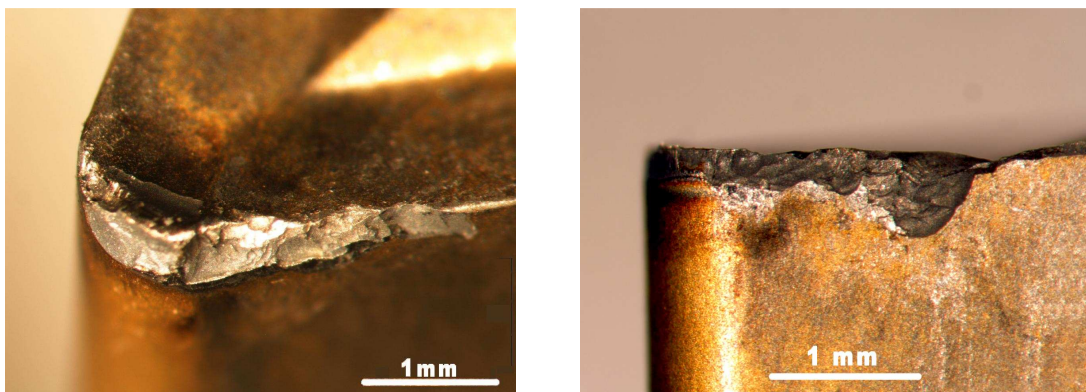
Two coated carbide tools chipping due to Built-Up-Edge.
